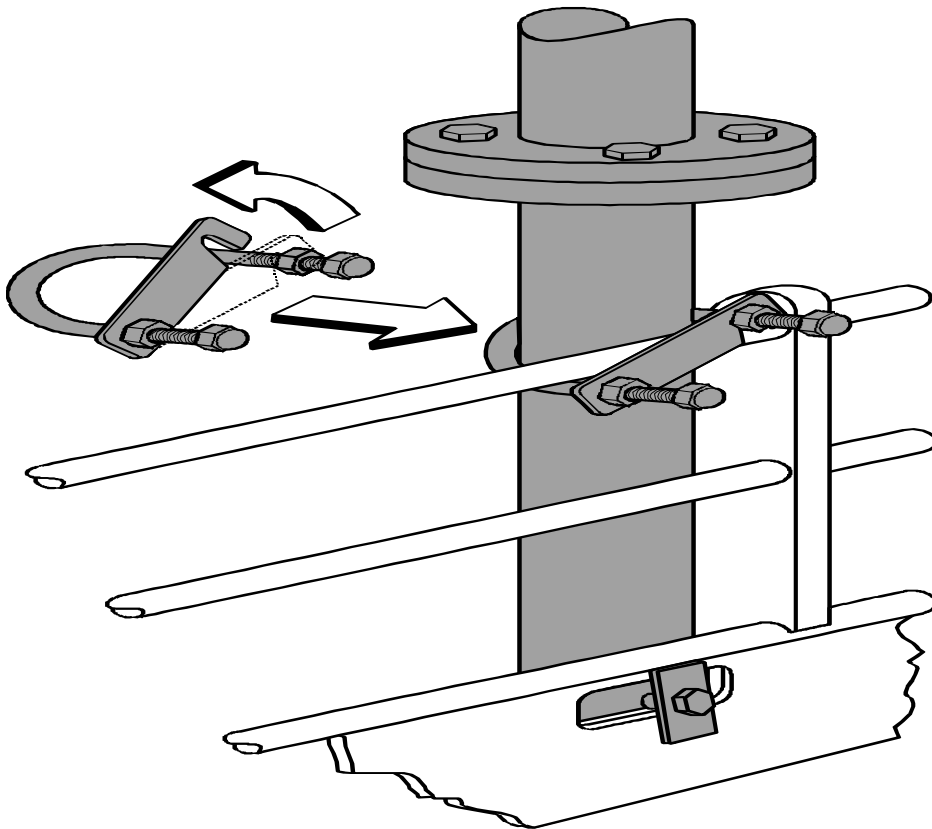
M1A1/M1A2 KSI Adapter Assembly Position.
